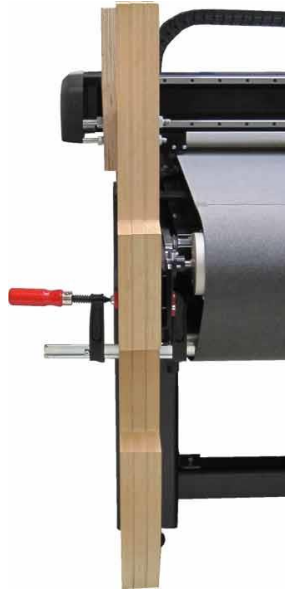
MOUNT FIXTURE LEFT SIDE
